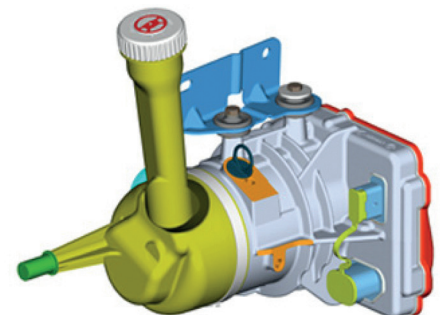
A die-cast aluminum housing protects the motor pump unit. The bonded joints are pretreated with PlasmaPlus to prevent failure of the adhesive bonds due to corrosion
